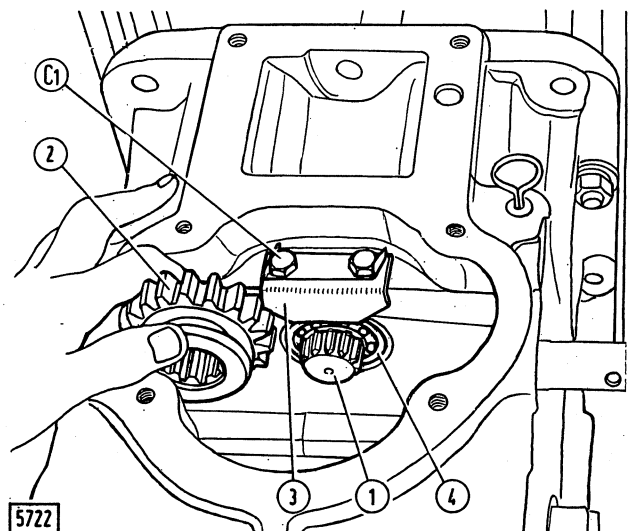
Rear transmission housing installed on turnover stand ARR 2220.
